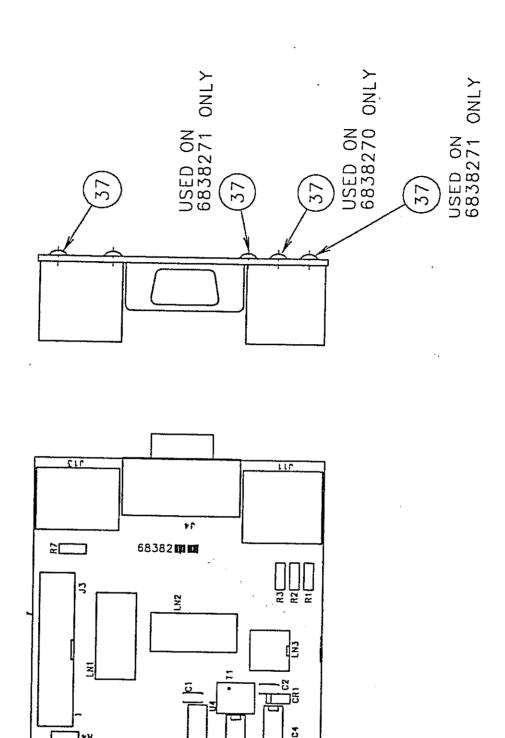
PARTS LOCATION DIAGRAM, PROBE BOARD
